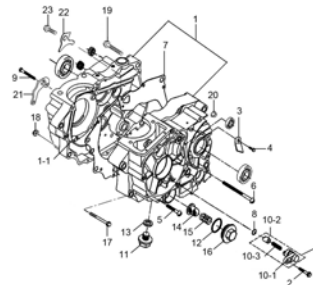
CRANKCASE COVER (P03-S040-0059)
